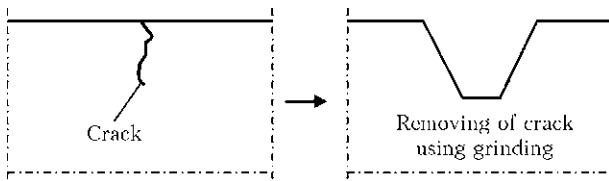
Example of crack in hypothetical structure part and its removal by machining [6]
